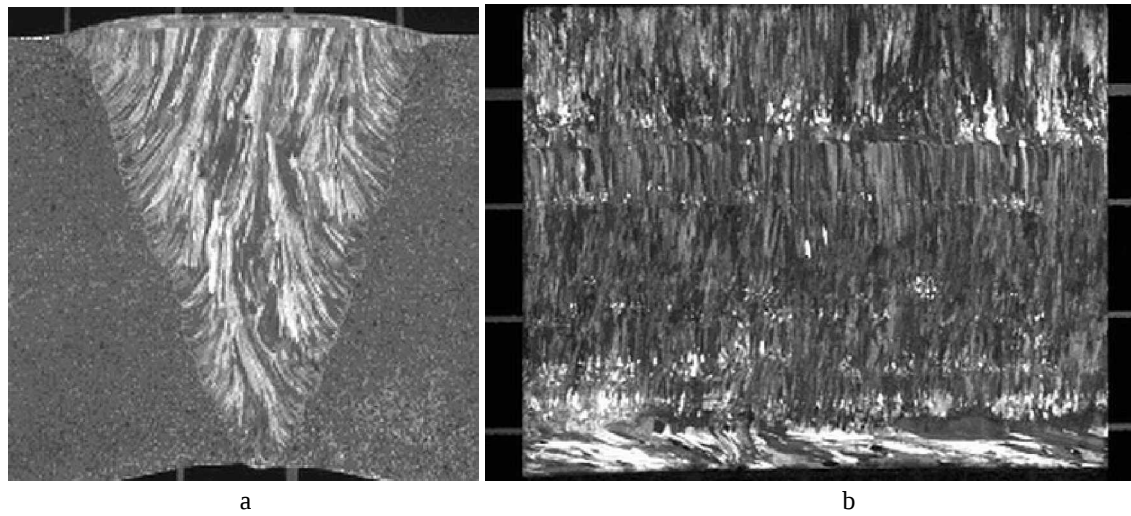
Transverse (a) and longitudinal (b) sections of a weld fabricated in the downhand position.
